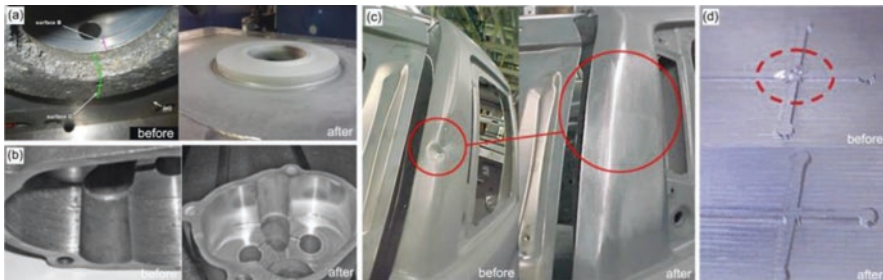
Comparison between damaged and CSR components: (a) an internal bore surface of a navy valve actuator, (b) an oil pump housing of Caterpillar engine, (c) a large cast automotive part, and (d) a mold (Lee et al. 2007; Lyalyakin et al. 2016; Maev et al. 2014; Widener et al. 2016)
